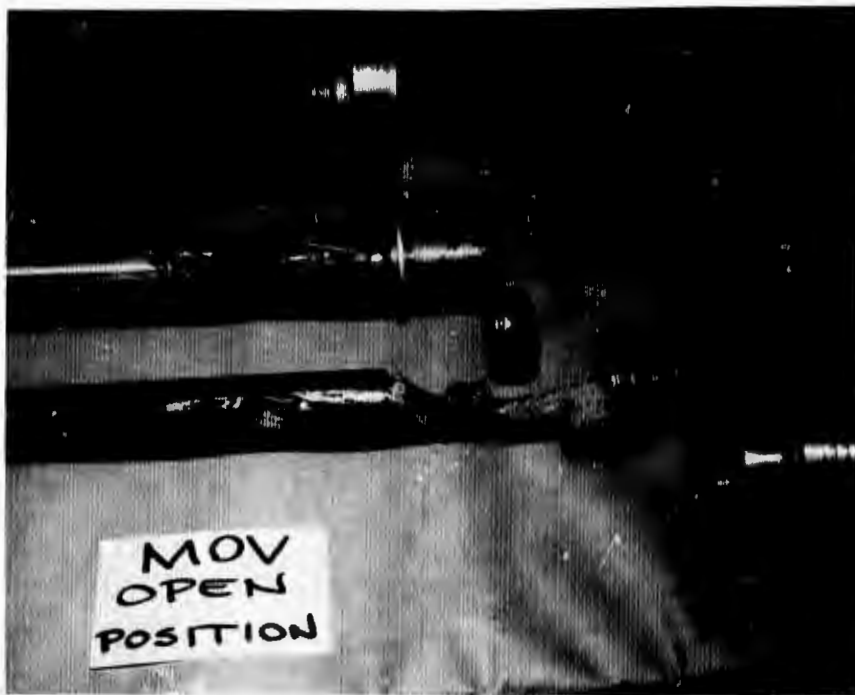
Main Oxidizer Valve Plug and Stem Assembly (U)
